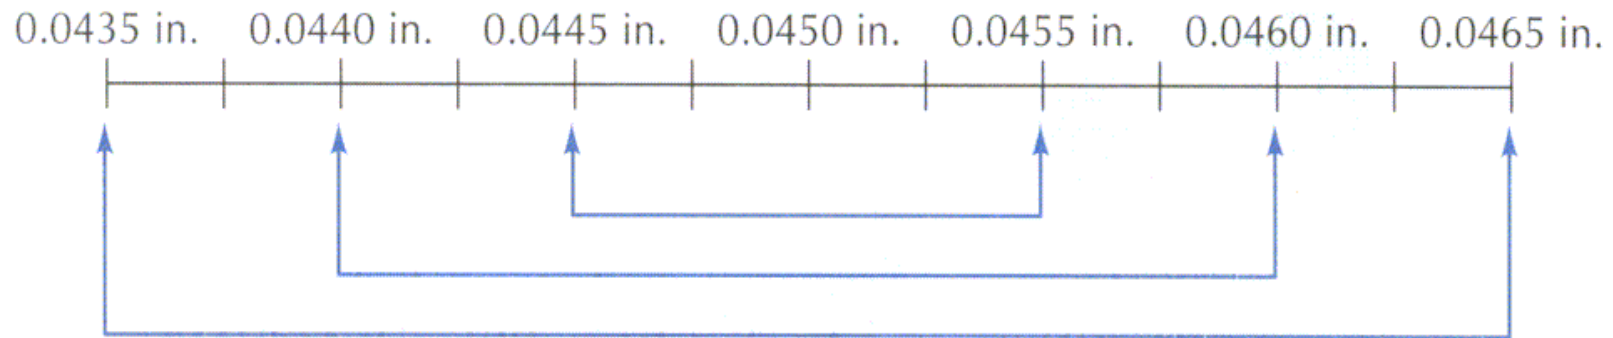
Selective Assembly Process Used to Assemble Hard Gaskets That Meet the Specifications
